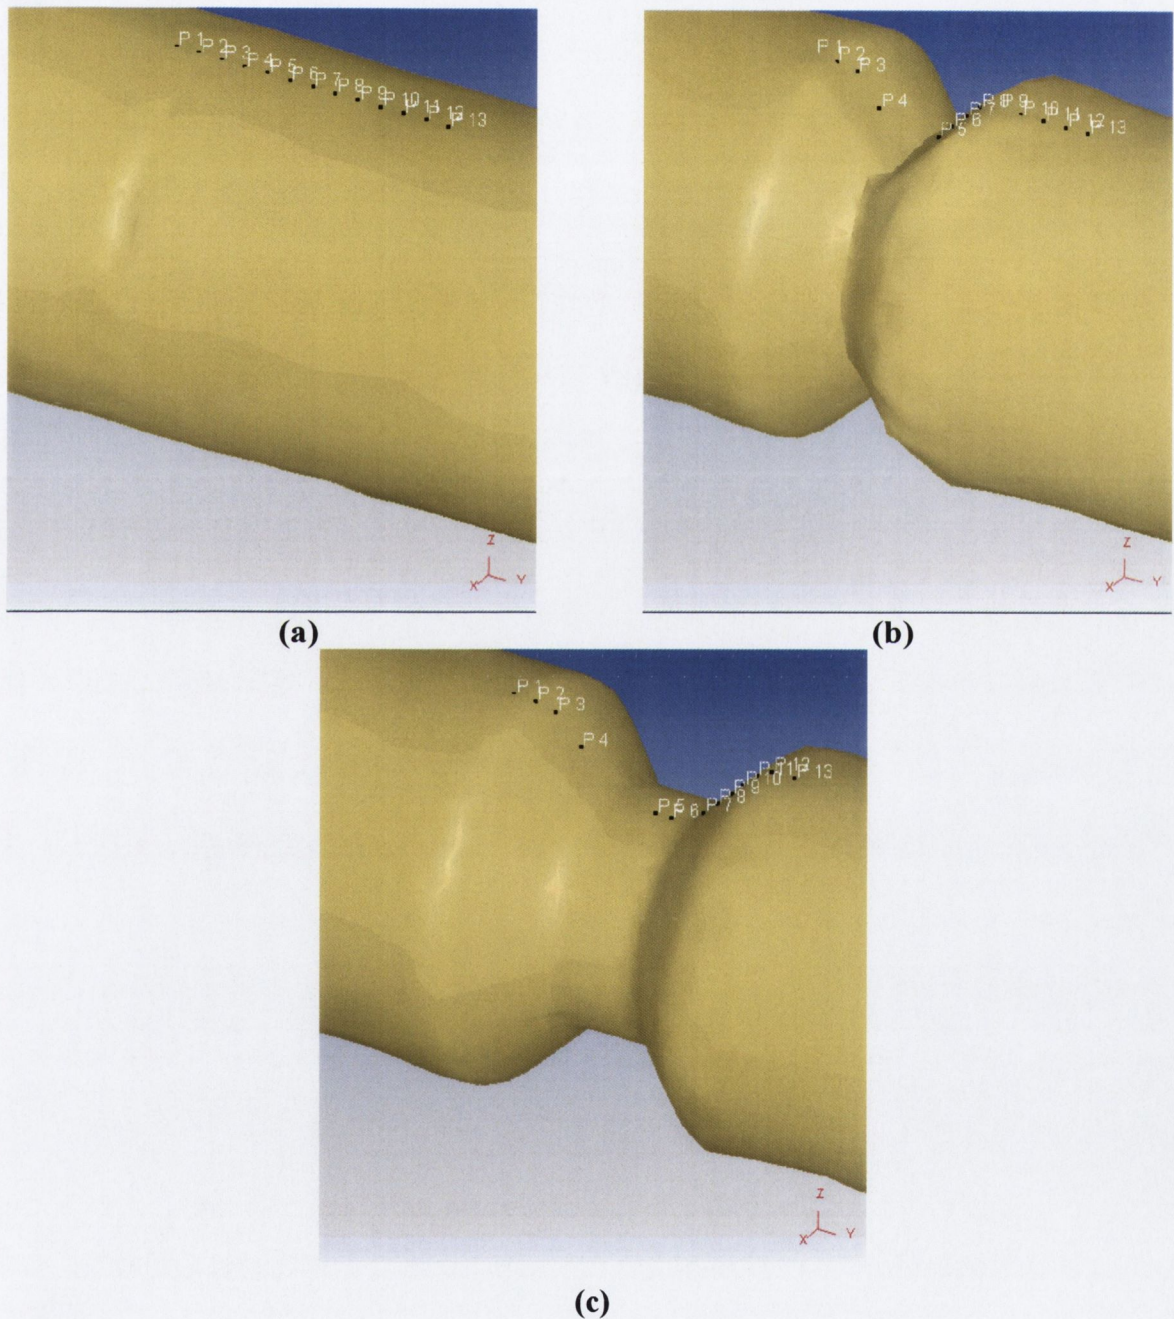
Selection of 13 selected points along the surface of the workpiece at regular intervals of 0.25mm during the Form Rolling of the second groove after (a) 3 (b) 5 and (c) 7 rotations.
